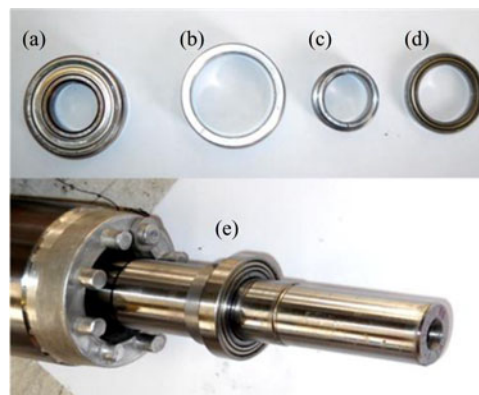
Rotor of the eccentric motor unit. (Top) From left to right: (a) original bearing, (b) external and (c) internal eccentric rings, and (d) new bearing. (Bottom) (e) Mounted unit on the shaft.
